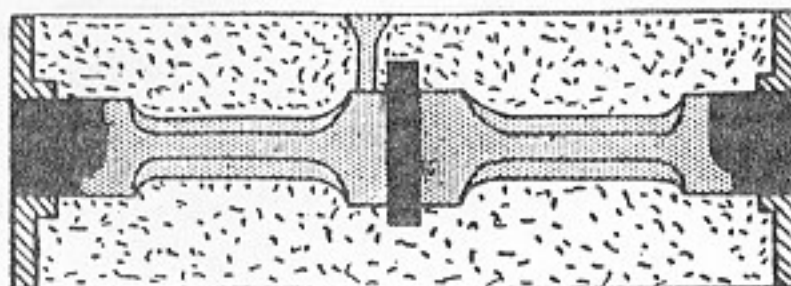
In order to produce a durable and hard-wearing surface on certain faces of a casting, iron chills are inserted into the mold, as shown above. The diagram illustrates a mold for a truck wheel with chills for the tread and axle.
